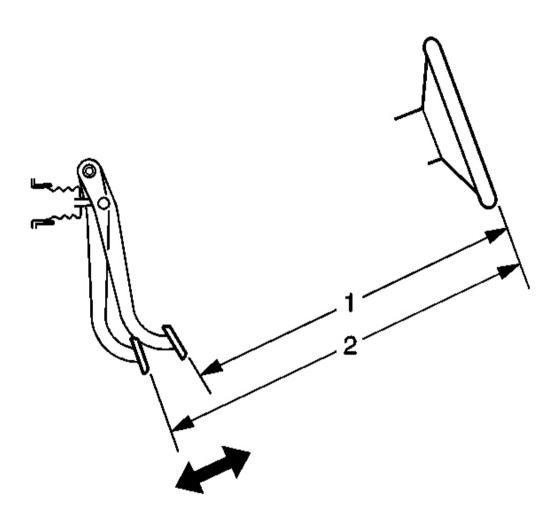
Measuring Brake Pedal Travel Courtesy of GENERAL MOTORS CORP.
